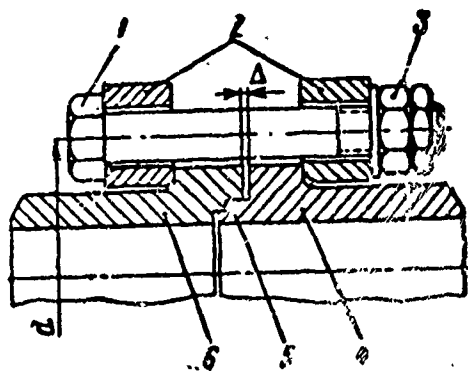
The sealing of a gasket using coupling flanges: 1 - bolt; 2 - coupling flange; 3 - nut; 4 - nipple, 5 - gasket; 6 - connector fitting.
